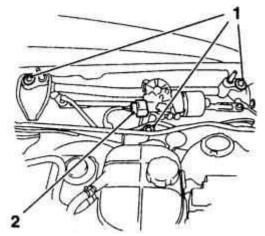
Mounting wiper motor: 1 - bolts, 2 - electric
